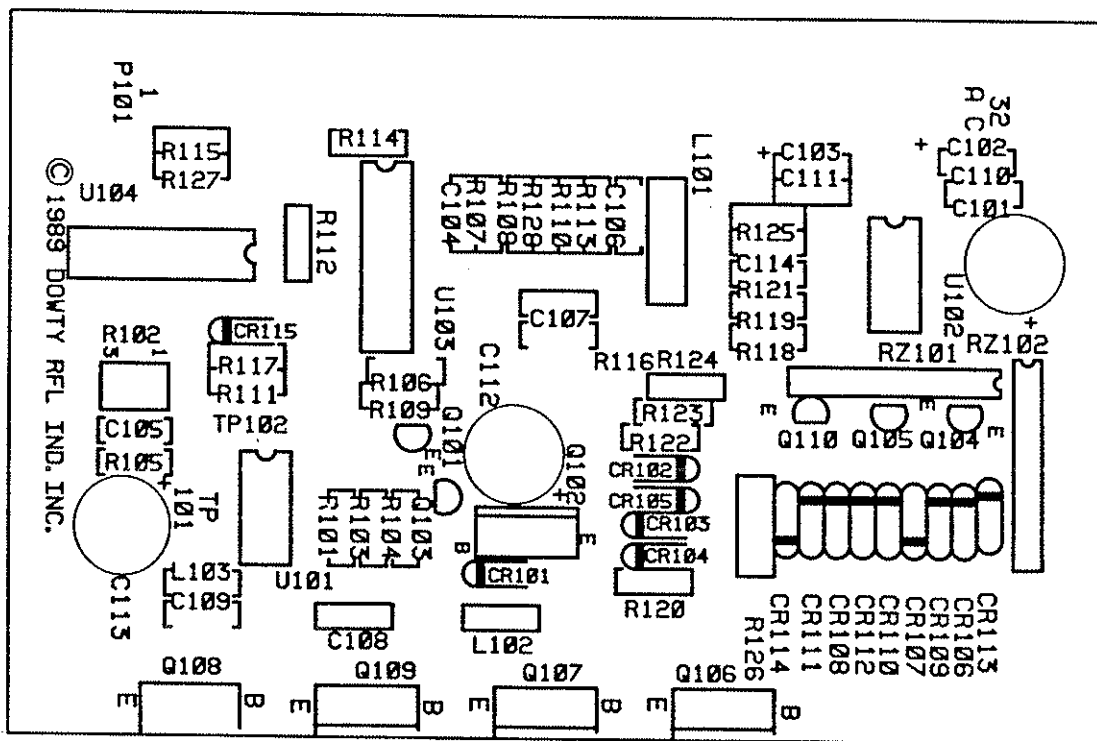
Component locator drawing, RFL 97 FO TX-13LS 1300-nm Singlemode Laser Fiber Optic Emitter Head (Assembly No. 101505; Drawing No. C-101508, Rev. B)
